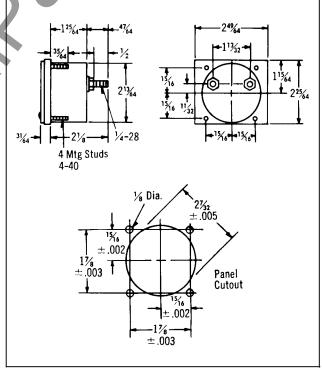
Mounting Dimensions and Panel Cut-Out for Indicating Ammeter
